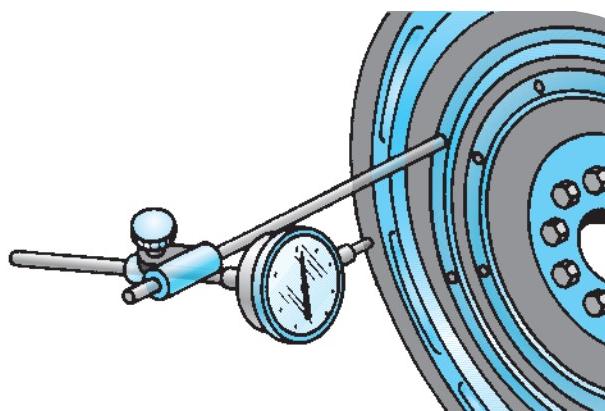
Checking flywheel housing axial concentricity. (Courtesy of Caterpillar)
